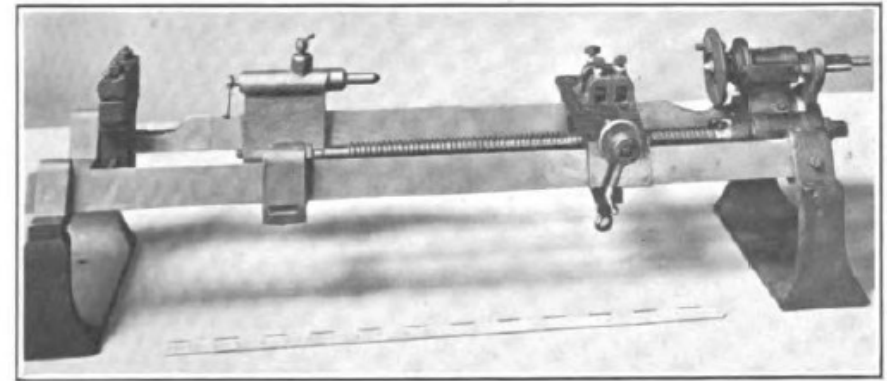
MAUDSLAY'S SCREW-CUTTING LATHE
